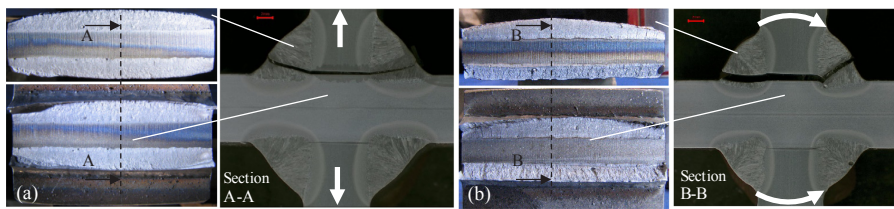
Typical fracture surface and failure paths in (a) axially loaded joints (FWB\_DYN17) and (b) bending loaded joints (FWB\_DYN5).
